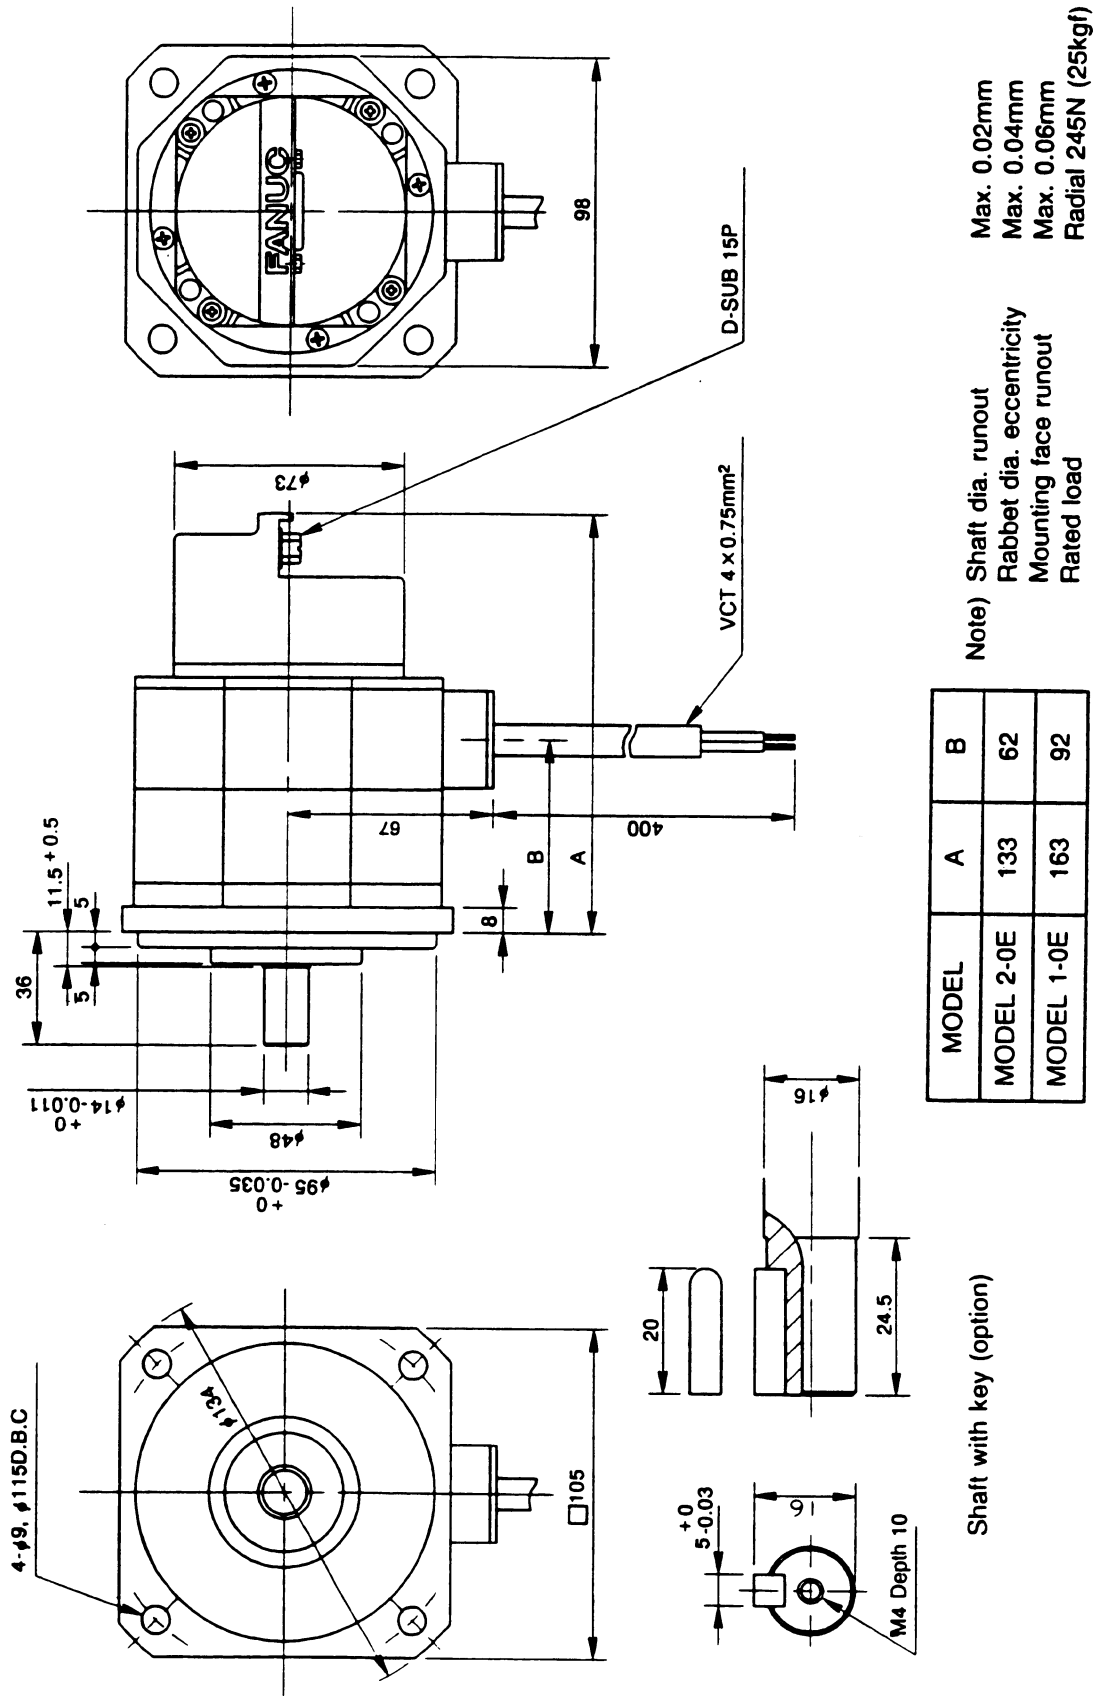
(b) AC Servo Motor 2-0E, 1-0E External View
